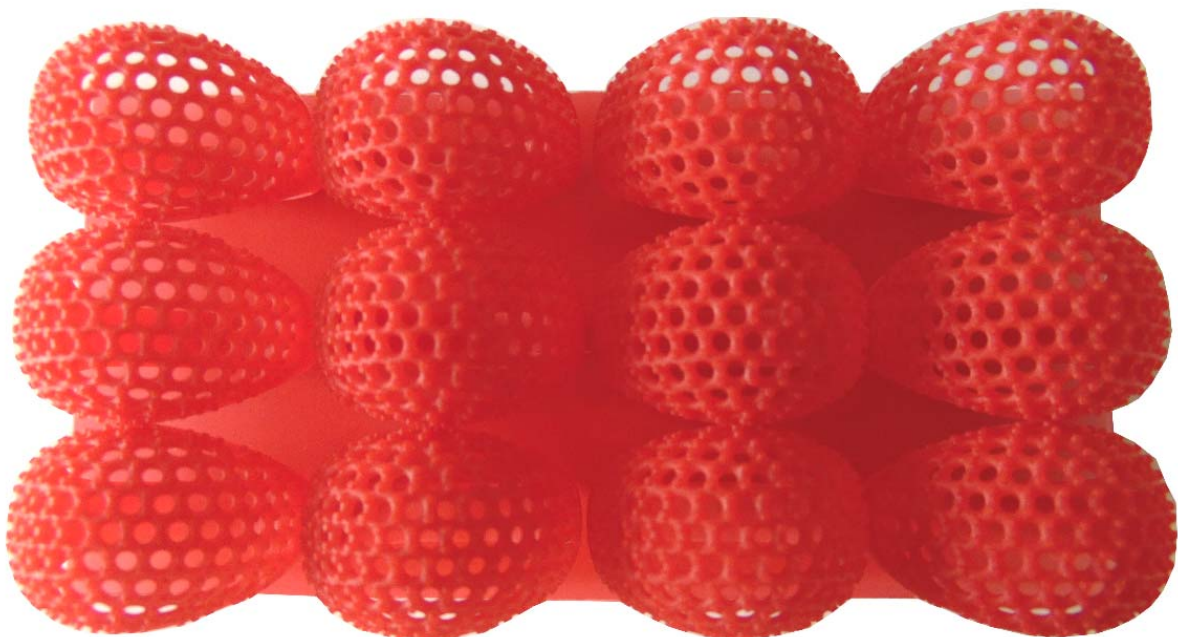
Dimensions of printing area: 100 x 56 mm.
